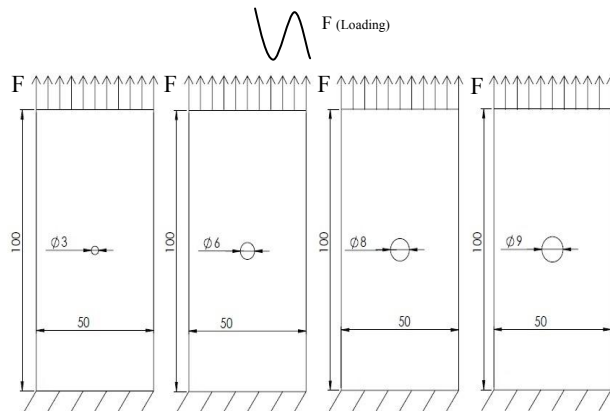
Geometric dimensions and boundary conditions of plates with circular cutouts (dimensions are in millimeter).
